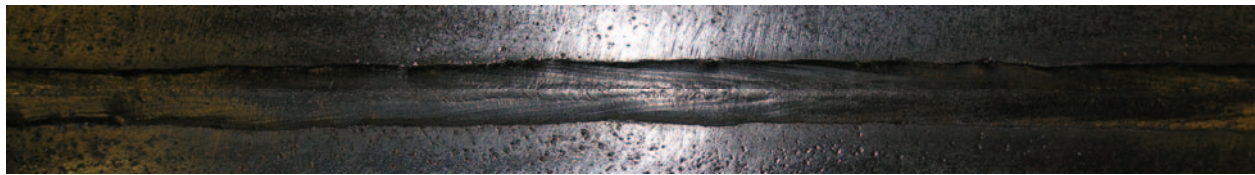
1/2” One-sided Weld – Root Side
